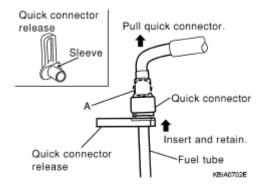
Inserting Quick Connector Release Into Quick Connector
